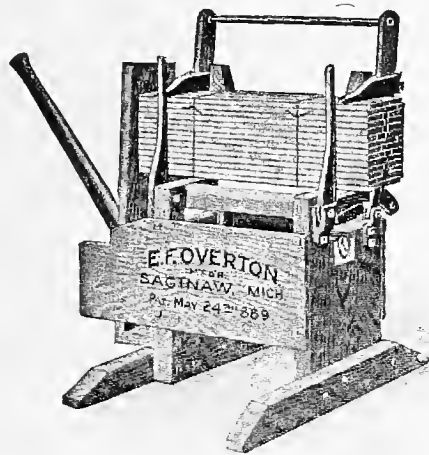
STAVE PACKER OR BUNDLING MACHINE.
